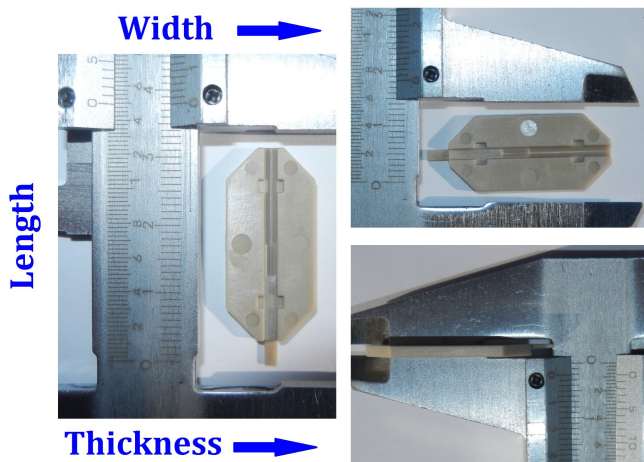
The vibration sensing cavity housed inside a PEEK package.
